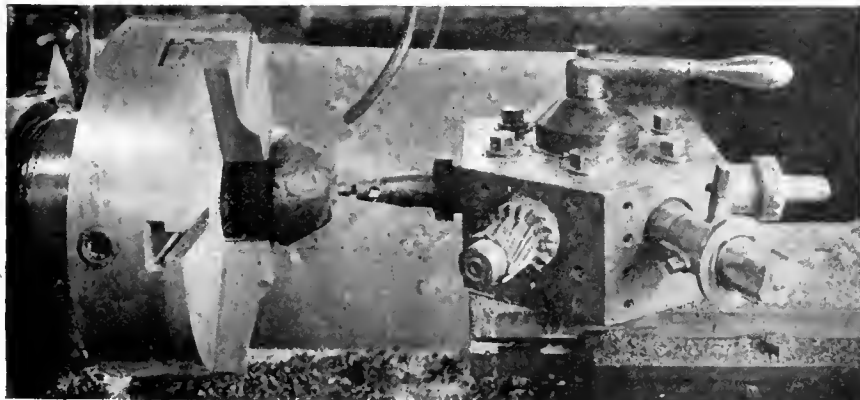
MACHINING SOCKET NOSE ON BARBONS & OLIVER LATHE.
